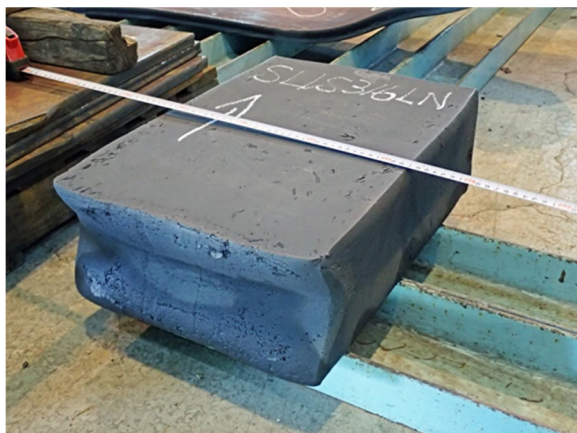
Hot rolled SUS316LN steel after the hot forging.
